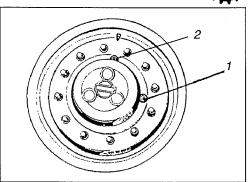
Planetary gearing / position for filling 1 Level plug 2 Filler plug
